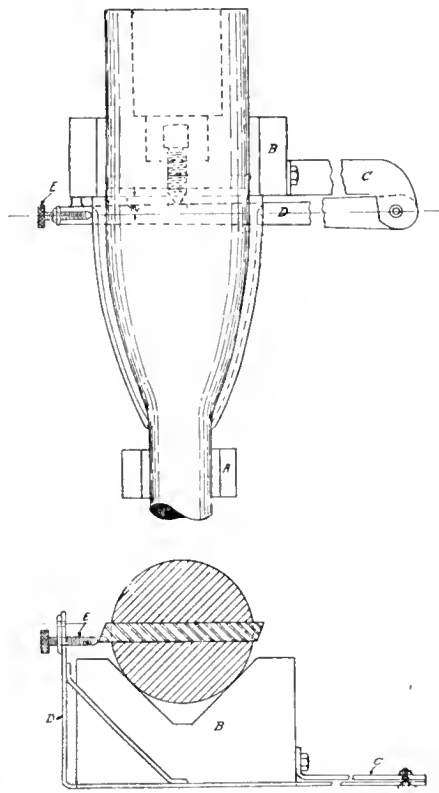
RADIUS GAUGE FOR INDICATING PROPER CLEARANCE ON FORMED CUTTER.
